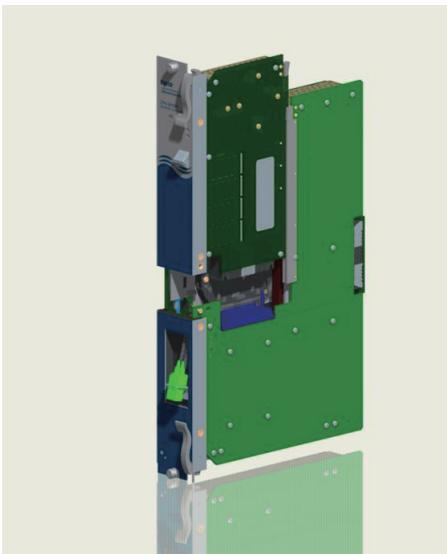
Mechanical drawing of a transceiver with the client port module partially inserted.
